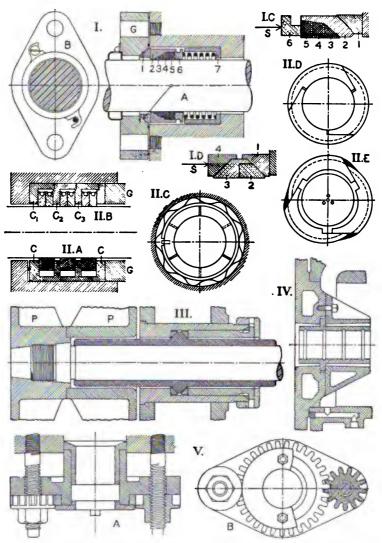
Types of Piston-rod Packing. I. "United States" metallic packing; II. Various ring-packings; III., IV. The plain solid bushing; V. Gland with geared nuts.
